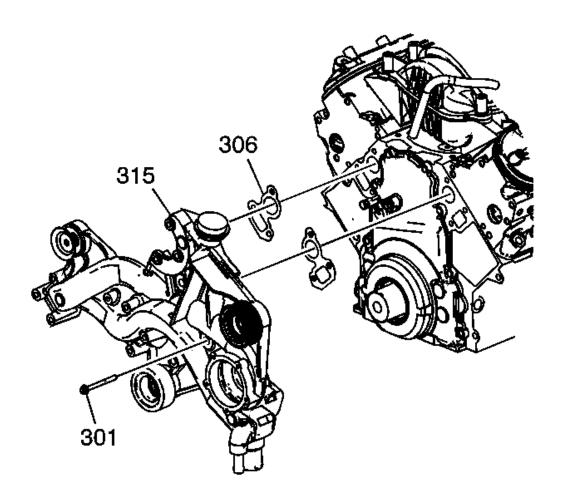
Water Manifold, Bolts & Gaskets Courtesy of GENERAL MOTORS CORP.
